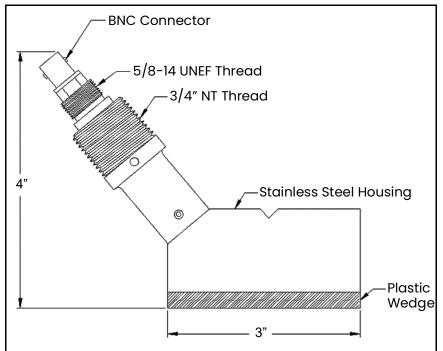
Transducer Assembly (Ref. dwg. 752-163)
